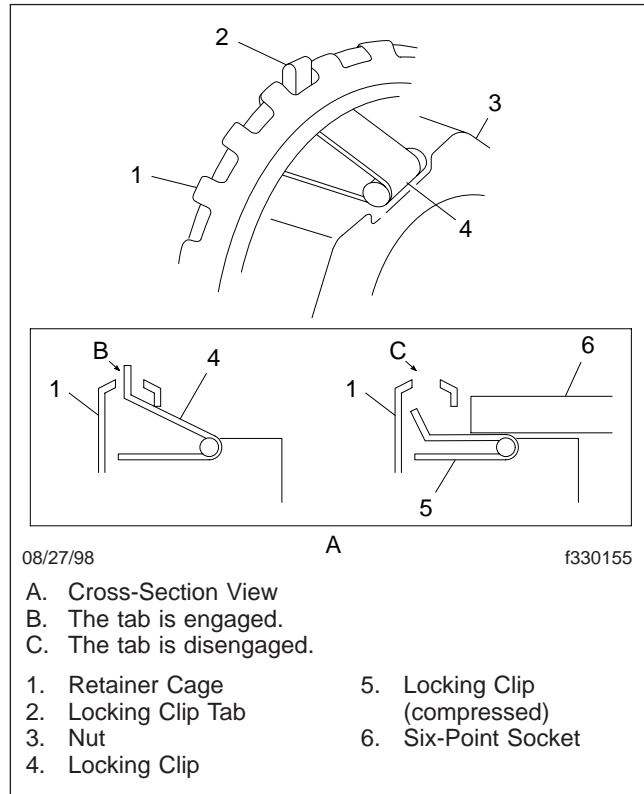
, Axilok Nut, Checking the Position of the Locking Clip
